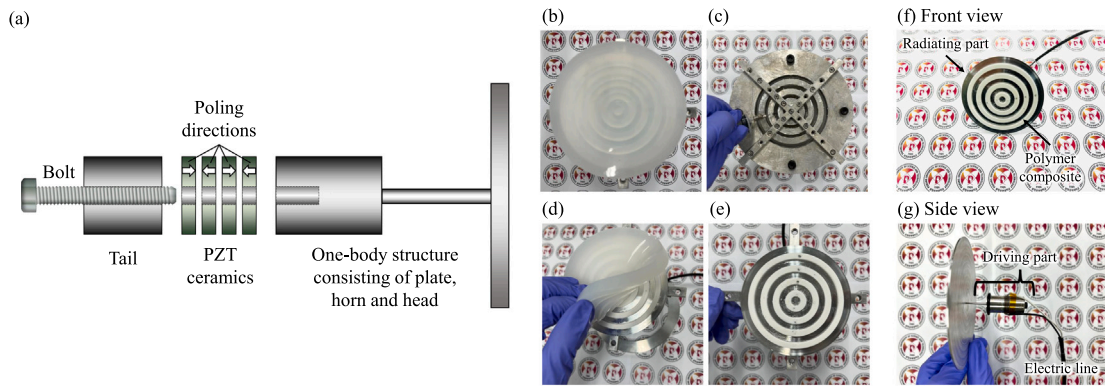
(a) Cross-sectional schematic of the transducer components. Fabrication process of the polymer composite steps: (b) mounted silicone mold on the jig for polymer injection, (c) injection of liquid polymer composite, (d) detaching the silicone mold after curing, and (e) gate mark removal and surface polishing. Photographs of the fabricated transducer: (f) front and (g) side views.
